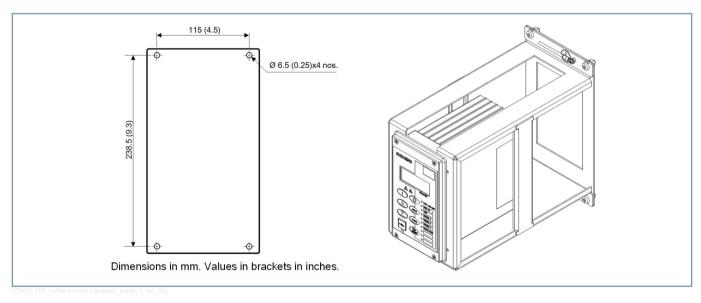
/24 Mounting Holes for Surface Mount Bracket and Assembled Bracket with 7SR10/7SR105
